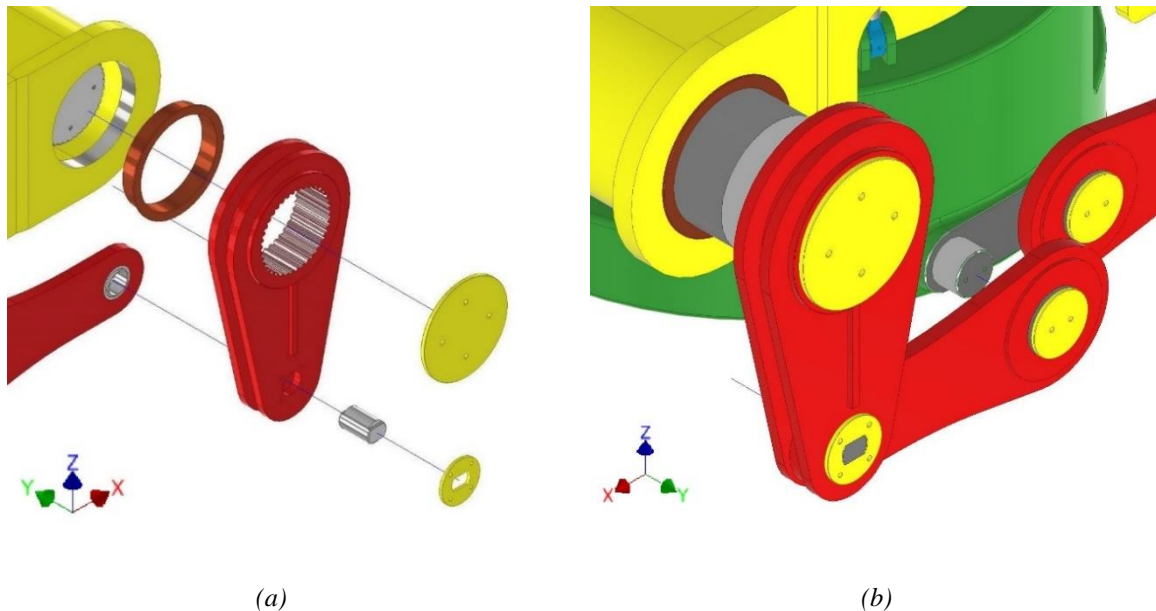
Shaft bearing replacement at (a) disconnected side and (b) connected side.
